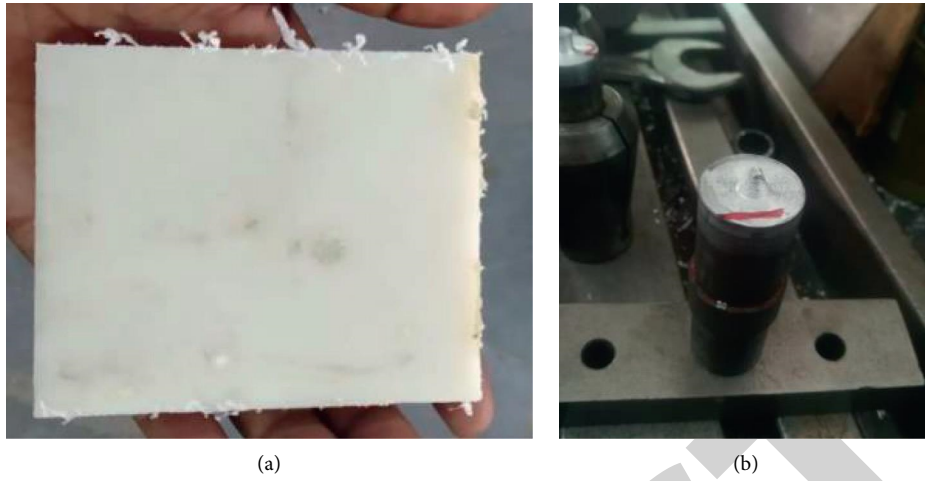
(a) Raw material of nylon. (b) Taper threaded tool.
